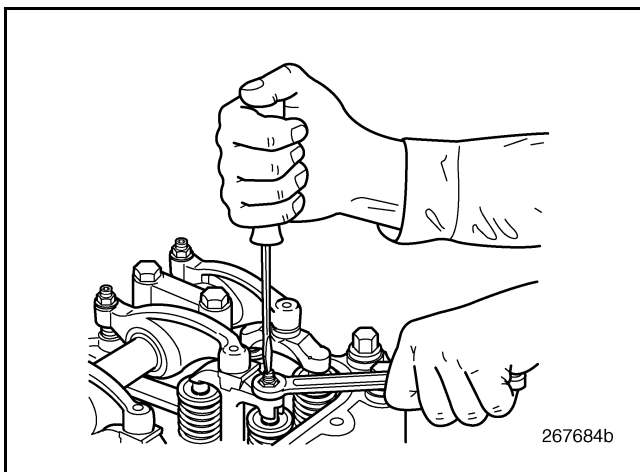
Loosening Exhaust Valve Yoke Adjusting Screw Locknut
